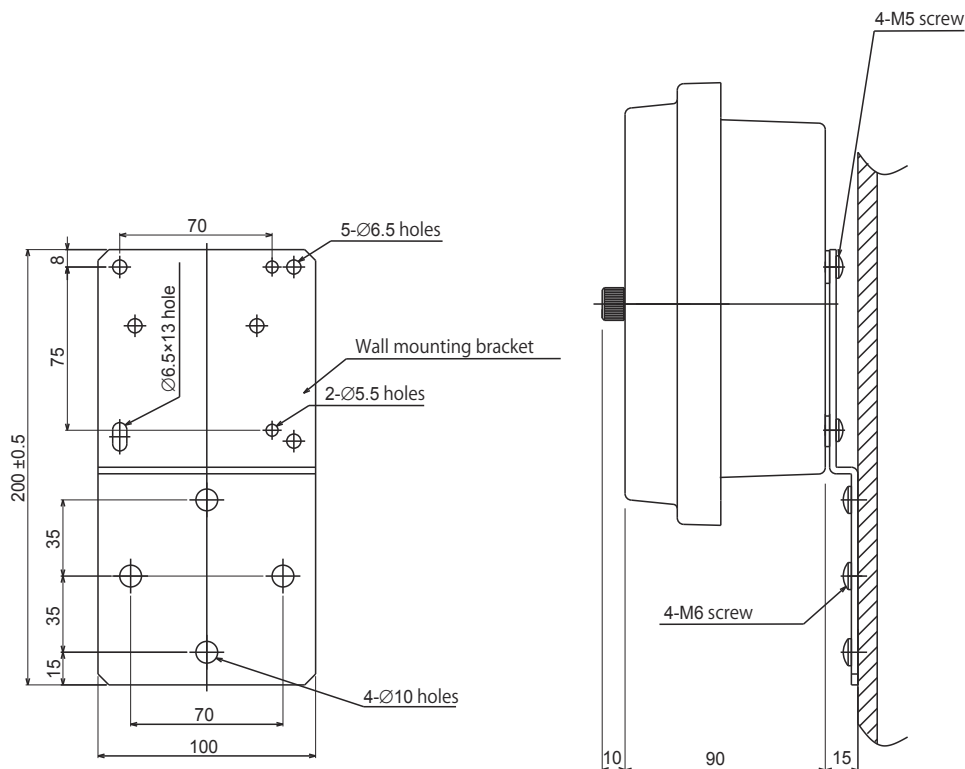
External View and Dimensions of Wall Mounting Bracket
